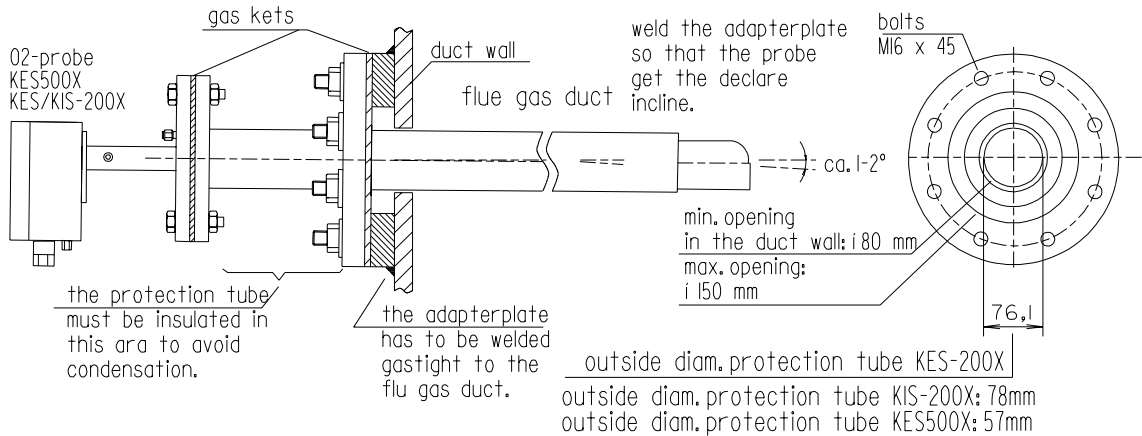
Mounting dimensions of the O₂ probe KES/KIS-200x with ADP-2000
